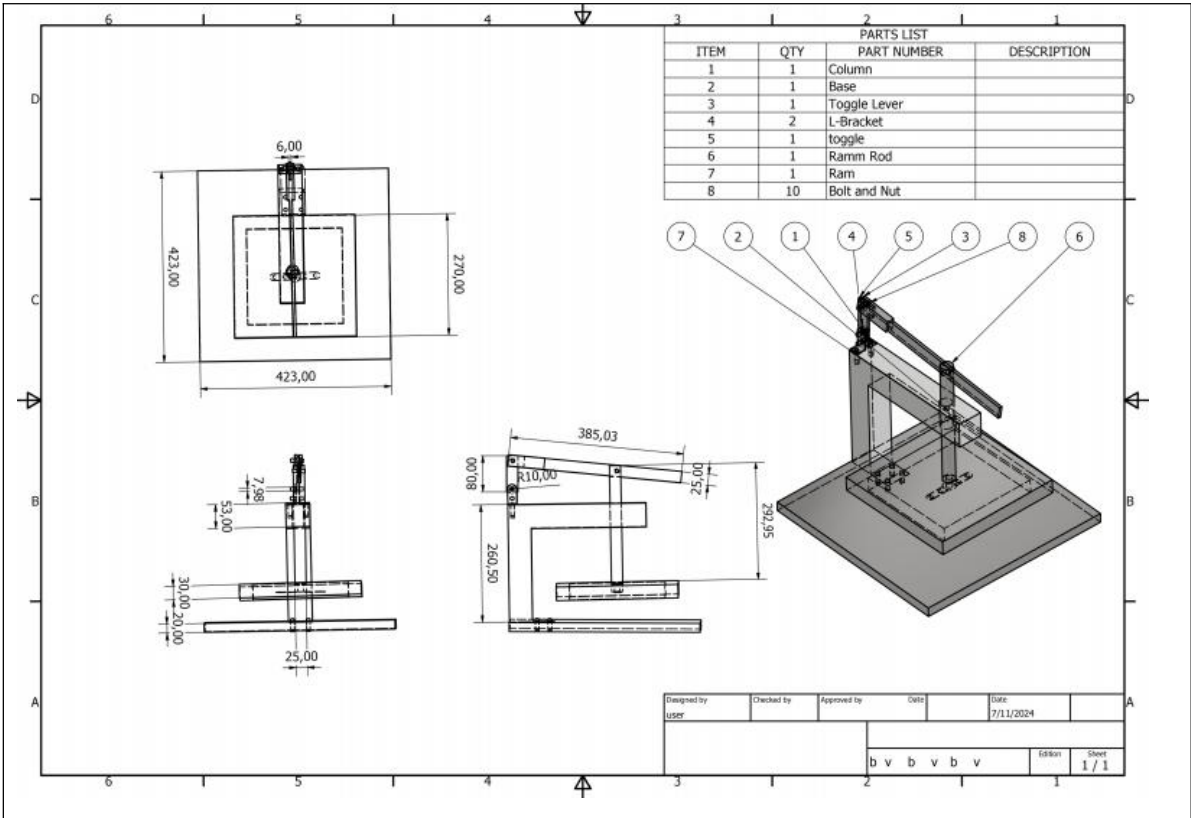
CAD drawing of the final design following the ISO drawing by using Autodesk Inventor software
